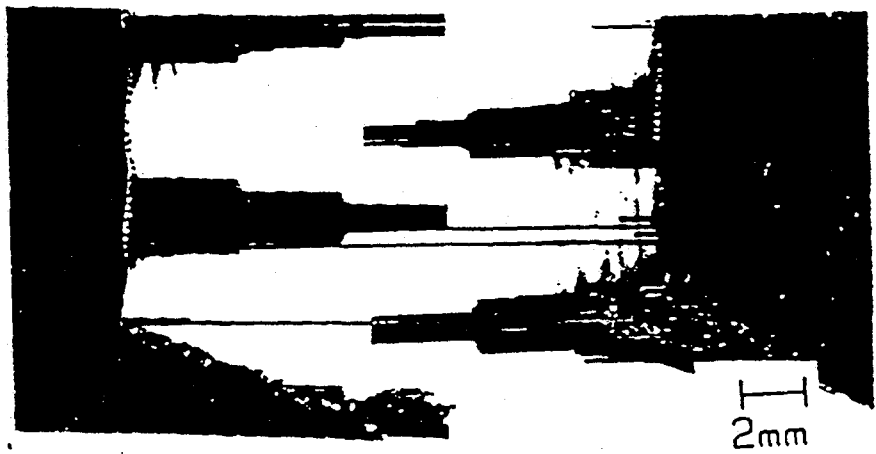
The fractured joint with the stepped sawtooth geometry showing extreme fiber pullout.
